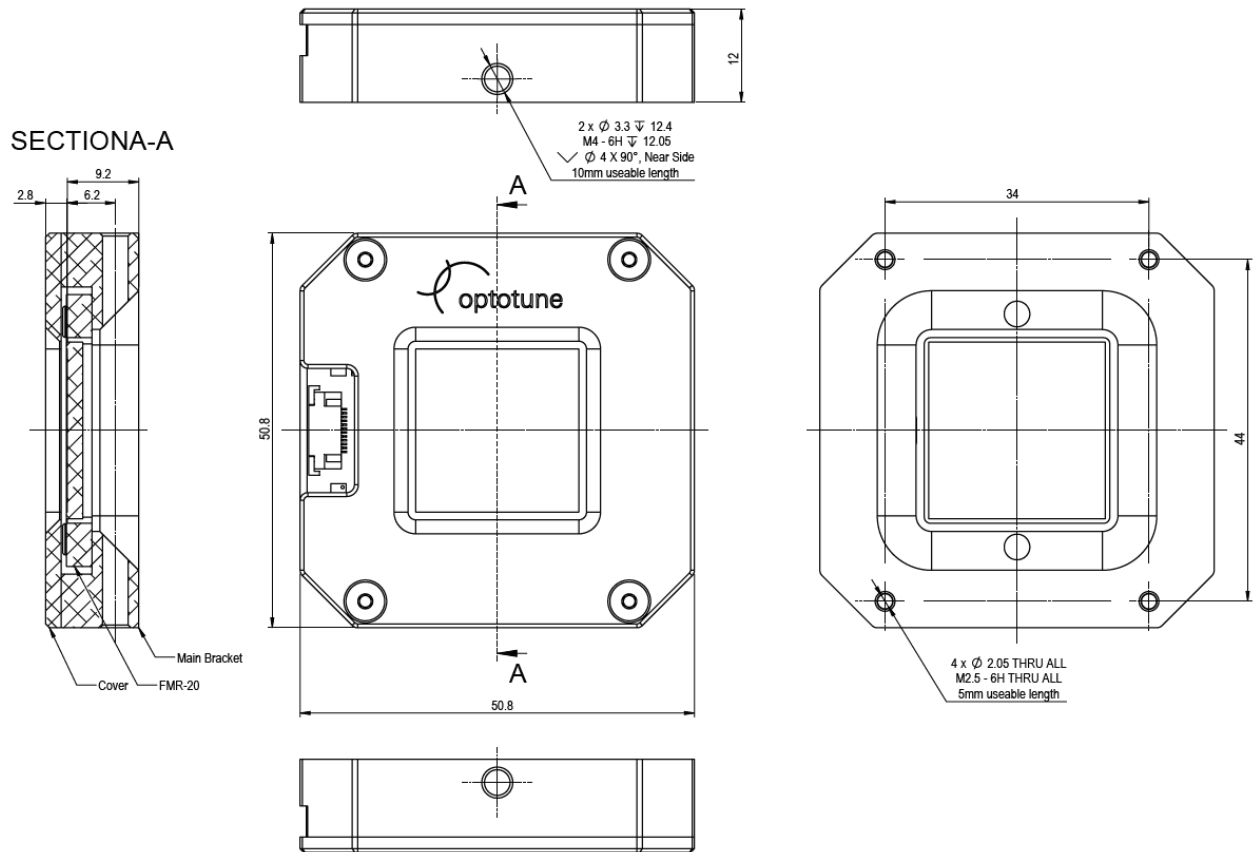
Mechanical drawing of the BSW-20 mounted in a housing. Units: mm.
